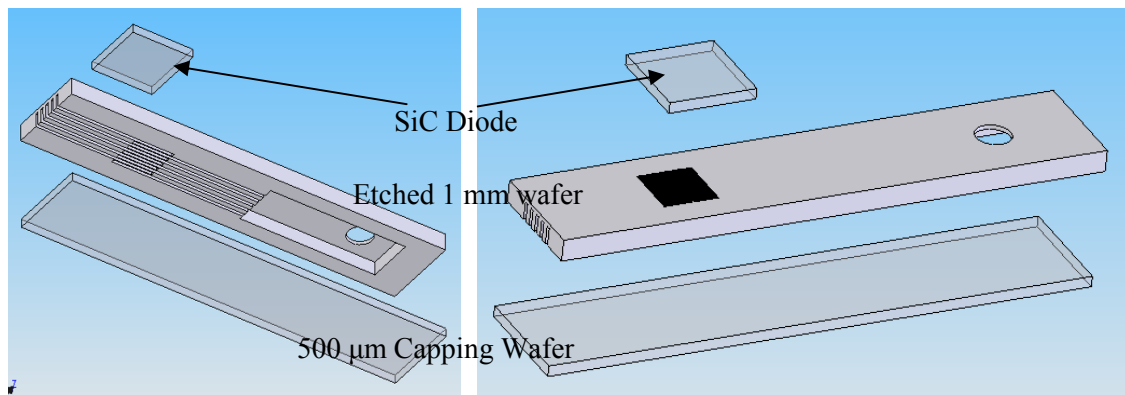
Exploded view of MMC2 depicting the three wafer stack
